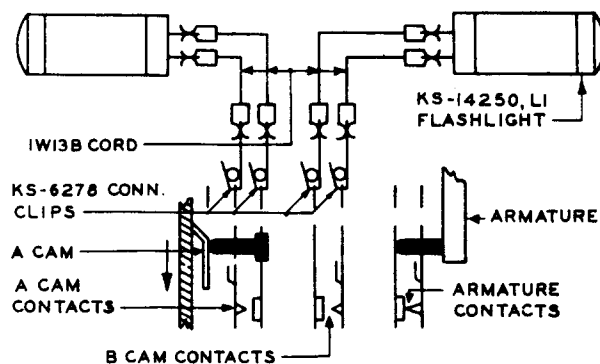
Connections for Checking "A" and "B" Cam Closures
